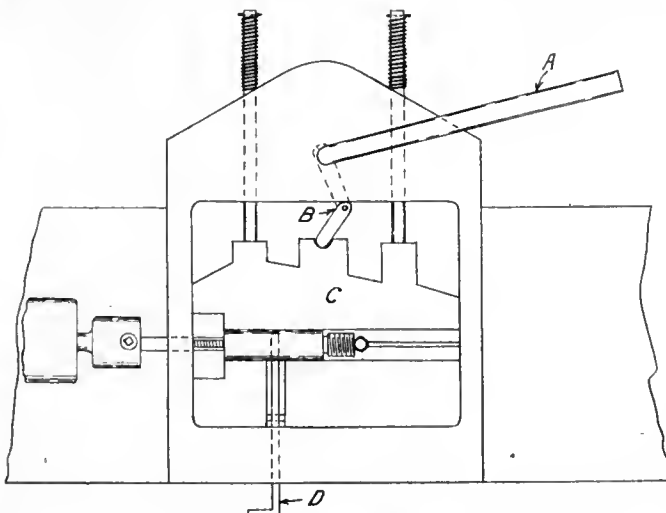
PLAN VIEW TAPPING MACHINE VISE.
